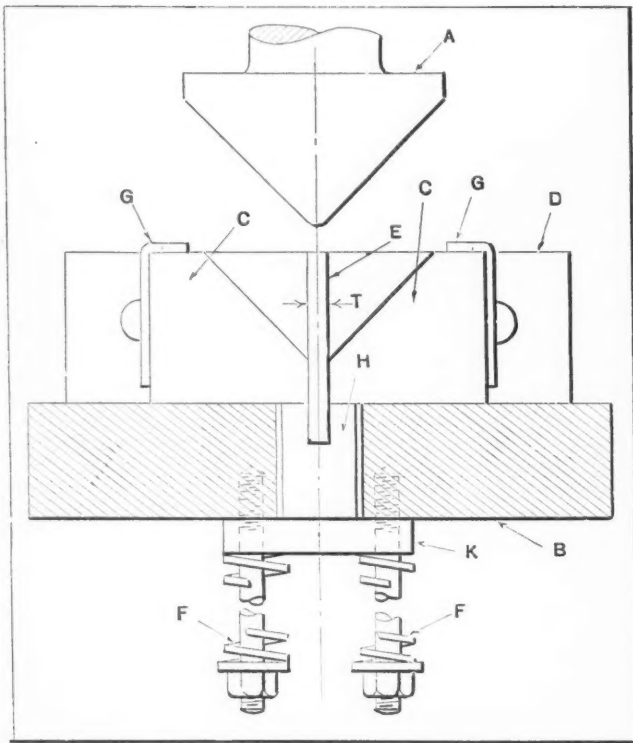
V-block Type of Bending Die for Forming Angles W, Fig. 2
